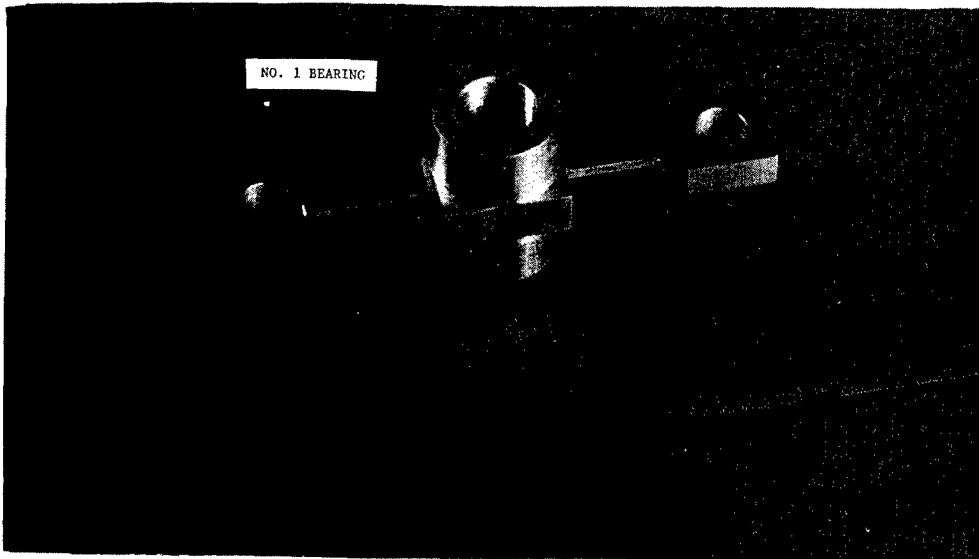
View Of An Upper Pivot-Support Flexure
